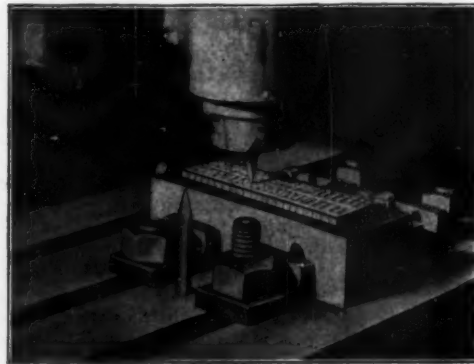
Detail View Showing How the Cutter Works on the Type.
